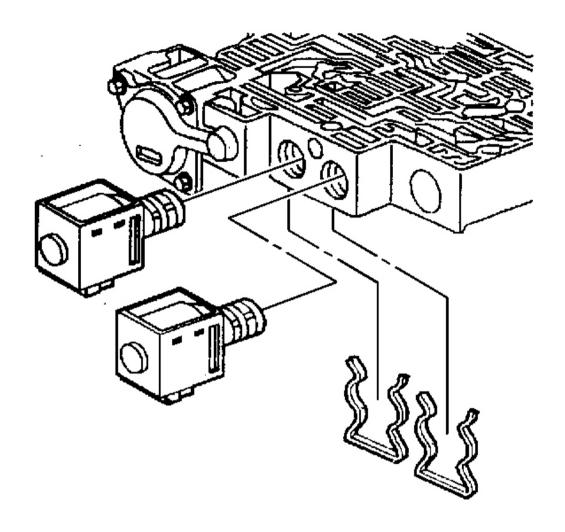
1-2 & 2-3 Shift Solenoids Courtesy of GENERAL MOTORS CORP.
